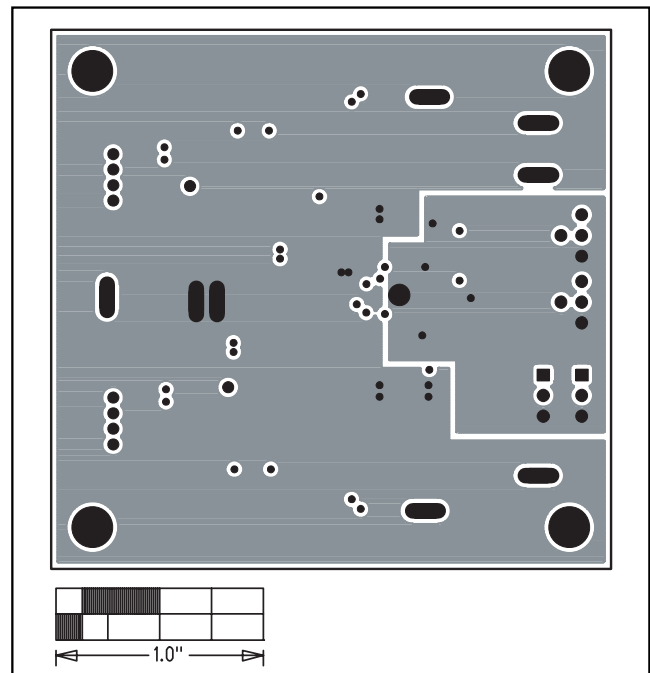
MAX8716 EV Kit PC Board Layout—Internal Layer 3, PGND/GND Layer
